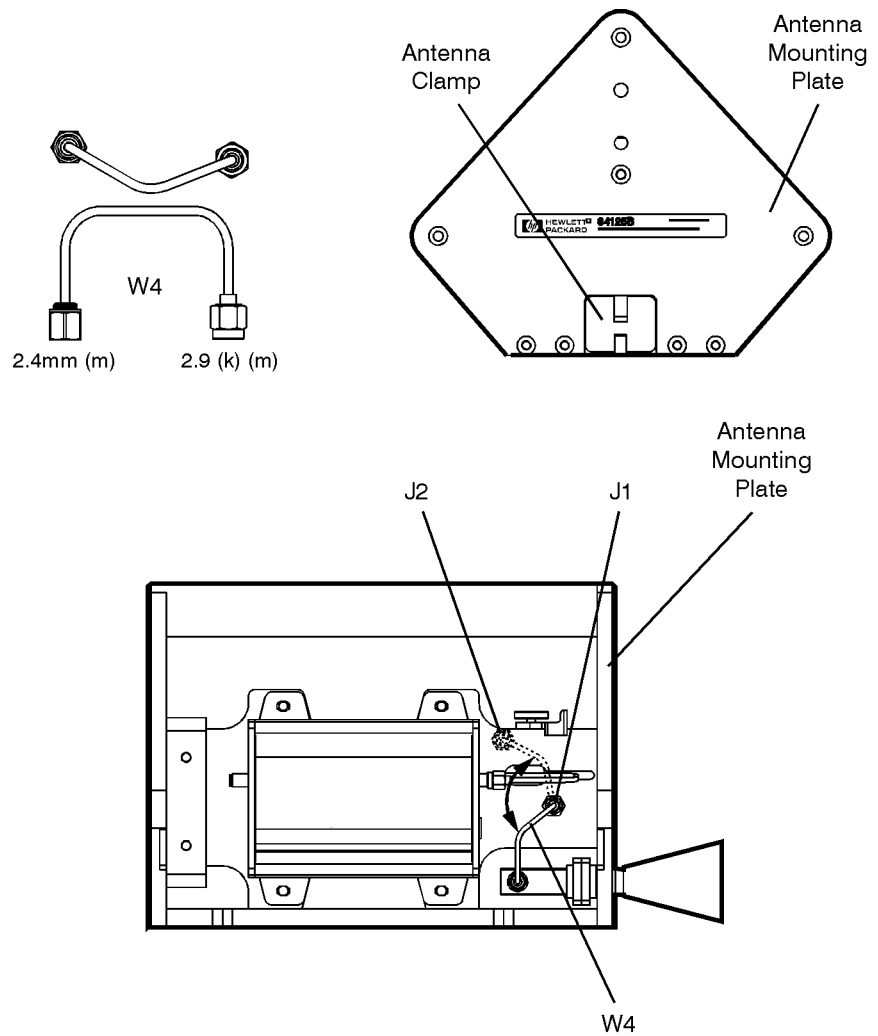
26.5 to 40 GHz Test-Set Configuration (side view)
